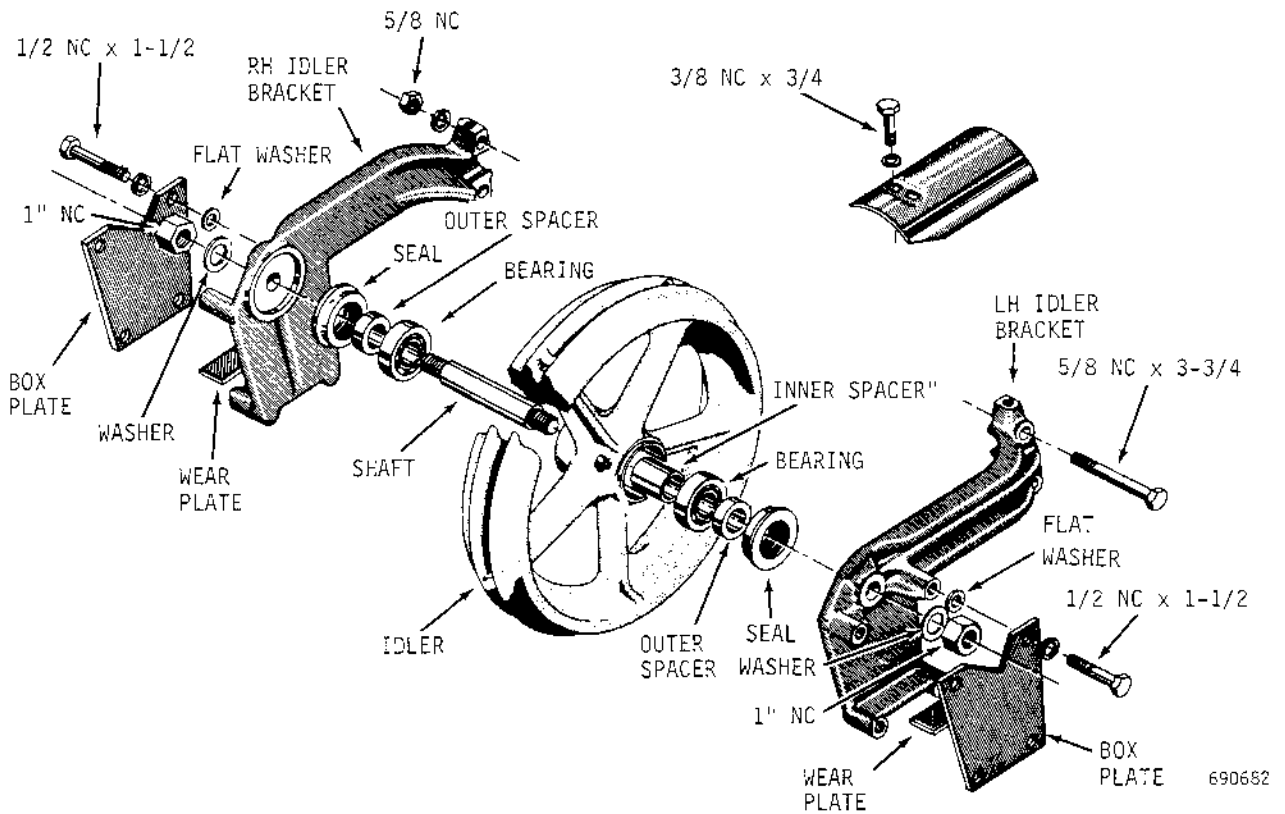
Exploded View of Idler Wheel (36 Ga. and 310G Before S/N 3039620)
